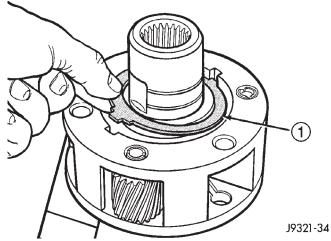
Front Tabbed Thrust Washer Removal 1 – FRONT TABBED THRUST WASHER
